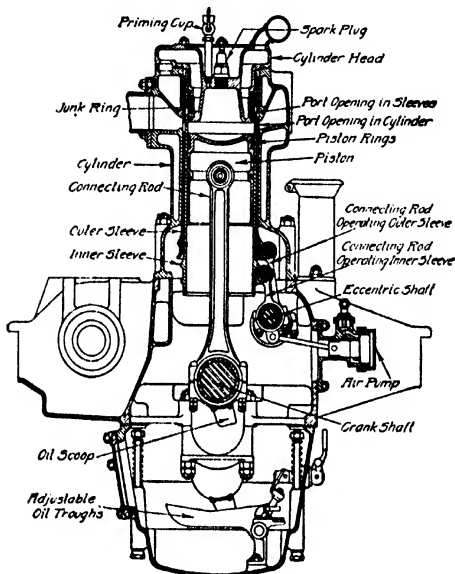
Transverse Section of Stearns-Knight Sleeve-Valve Motor
